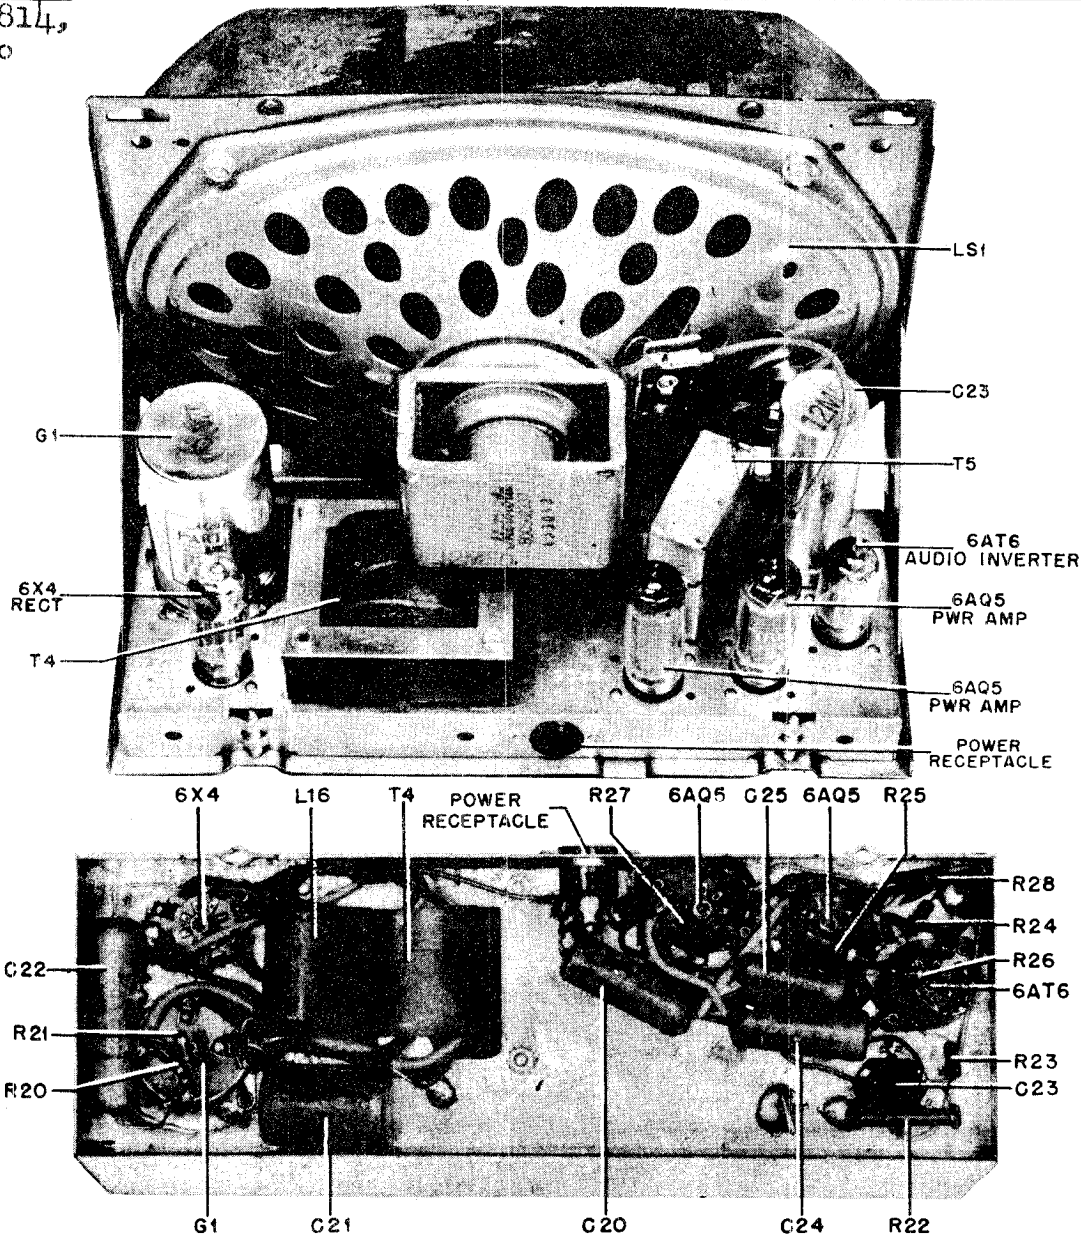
PARTS LOCATION - SPEAKER & POWER UNIT
